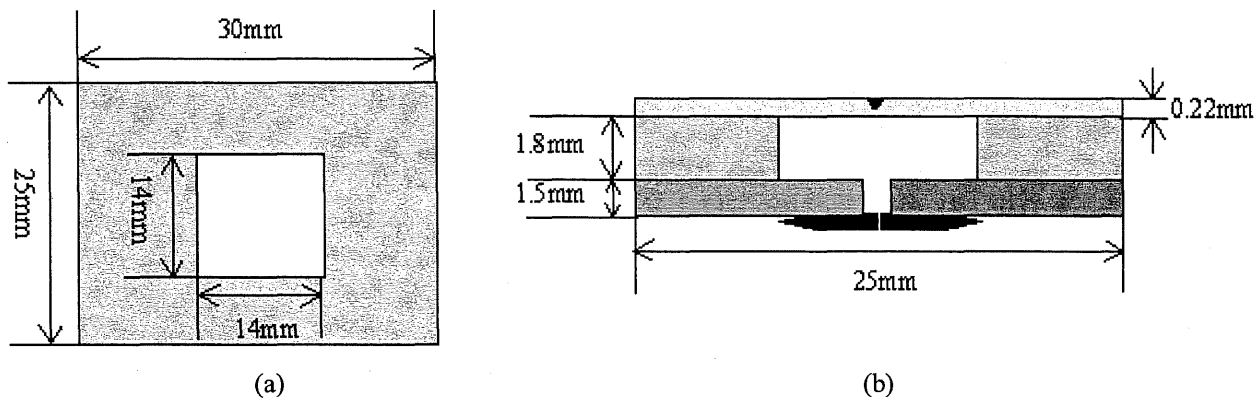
(a) Top and (b) cross-sectional views of the fabricated sensor, including the actual dimensions.
